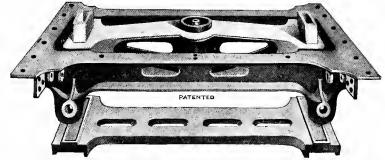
Commonwealth Cast Steel Center Frame for Four and Six-Wheel Passenger Train Car Trucks. Commonwealth Steel Company.
